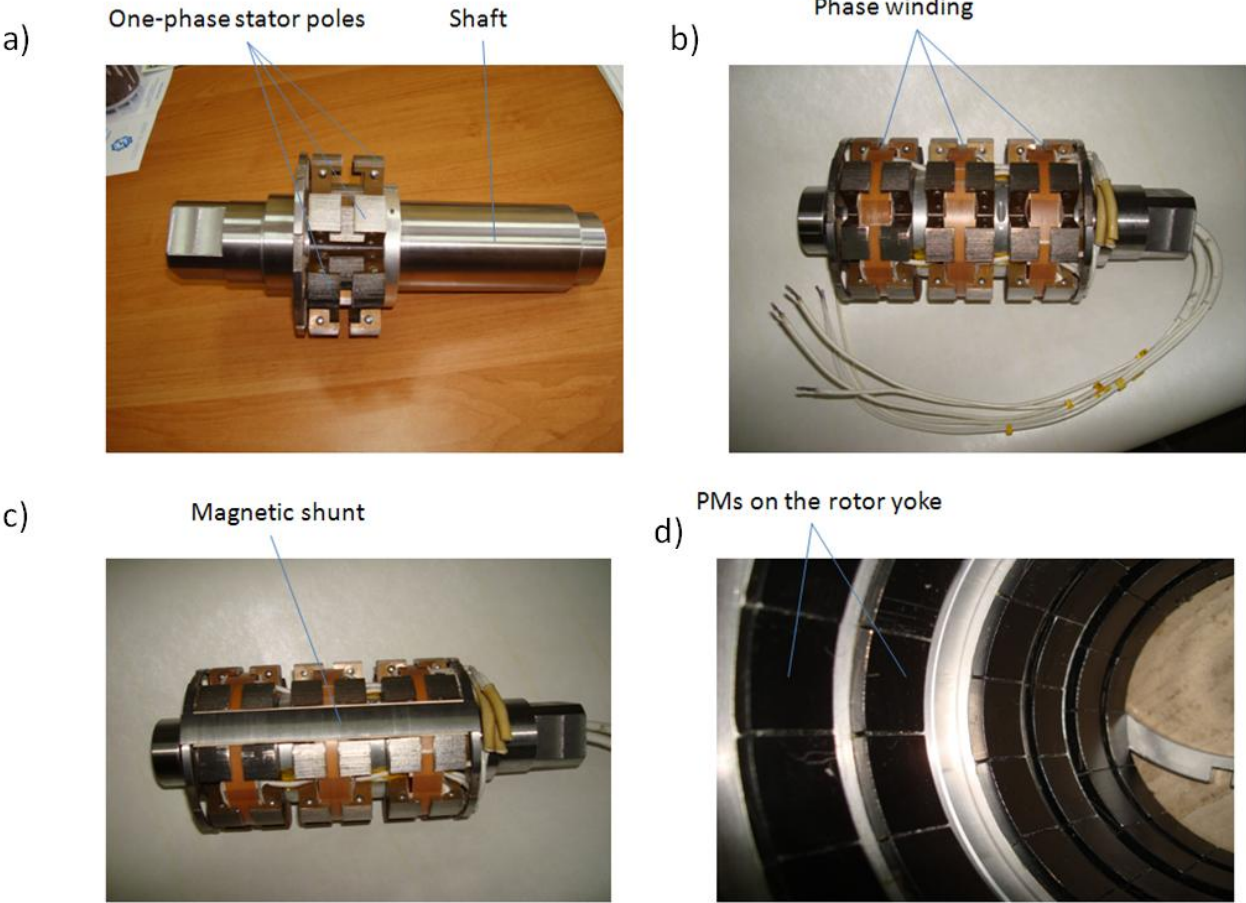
PMTF machine prototype: a) one phase stator poles on the shaft, b) shaft with 3 rings of stator poles, c) stator with magnetic shunts, d) rotor with permanent magnets
